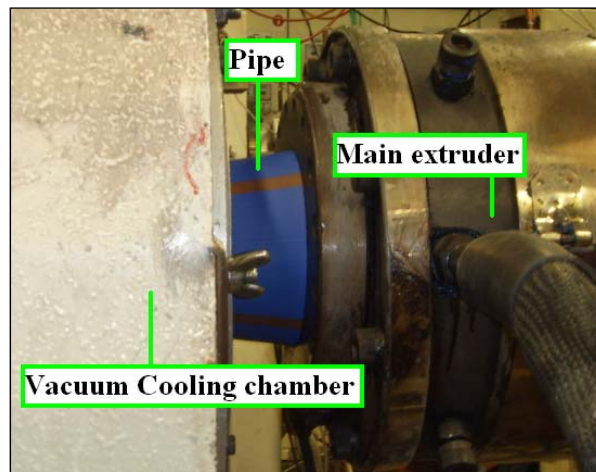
Extruder head showing co-extrusion of blue skin and brown stripes
